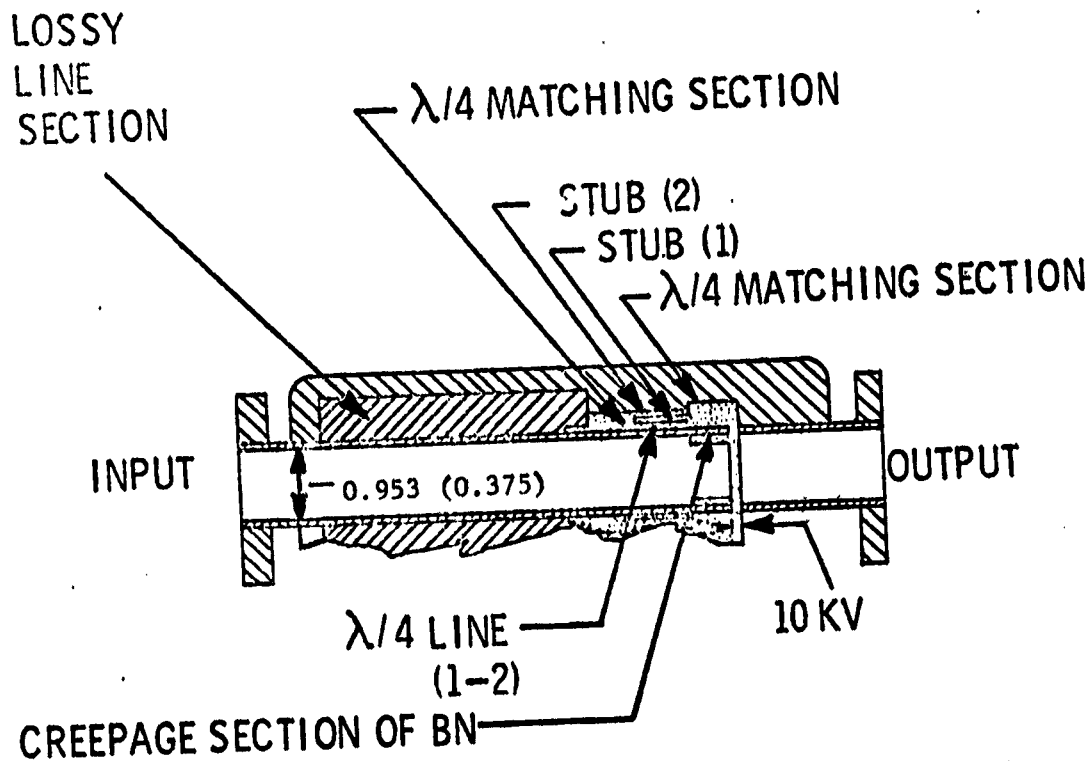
Configuration for DC High Voltage Blocking Flange
